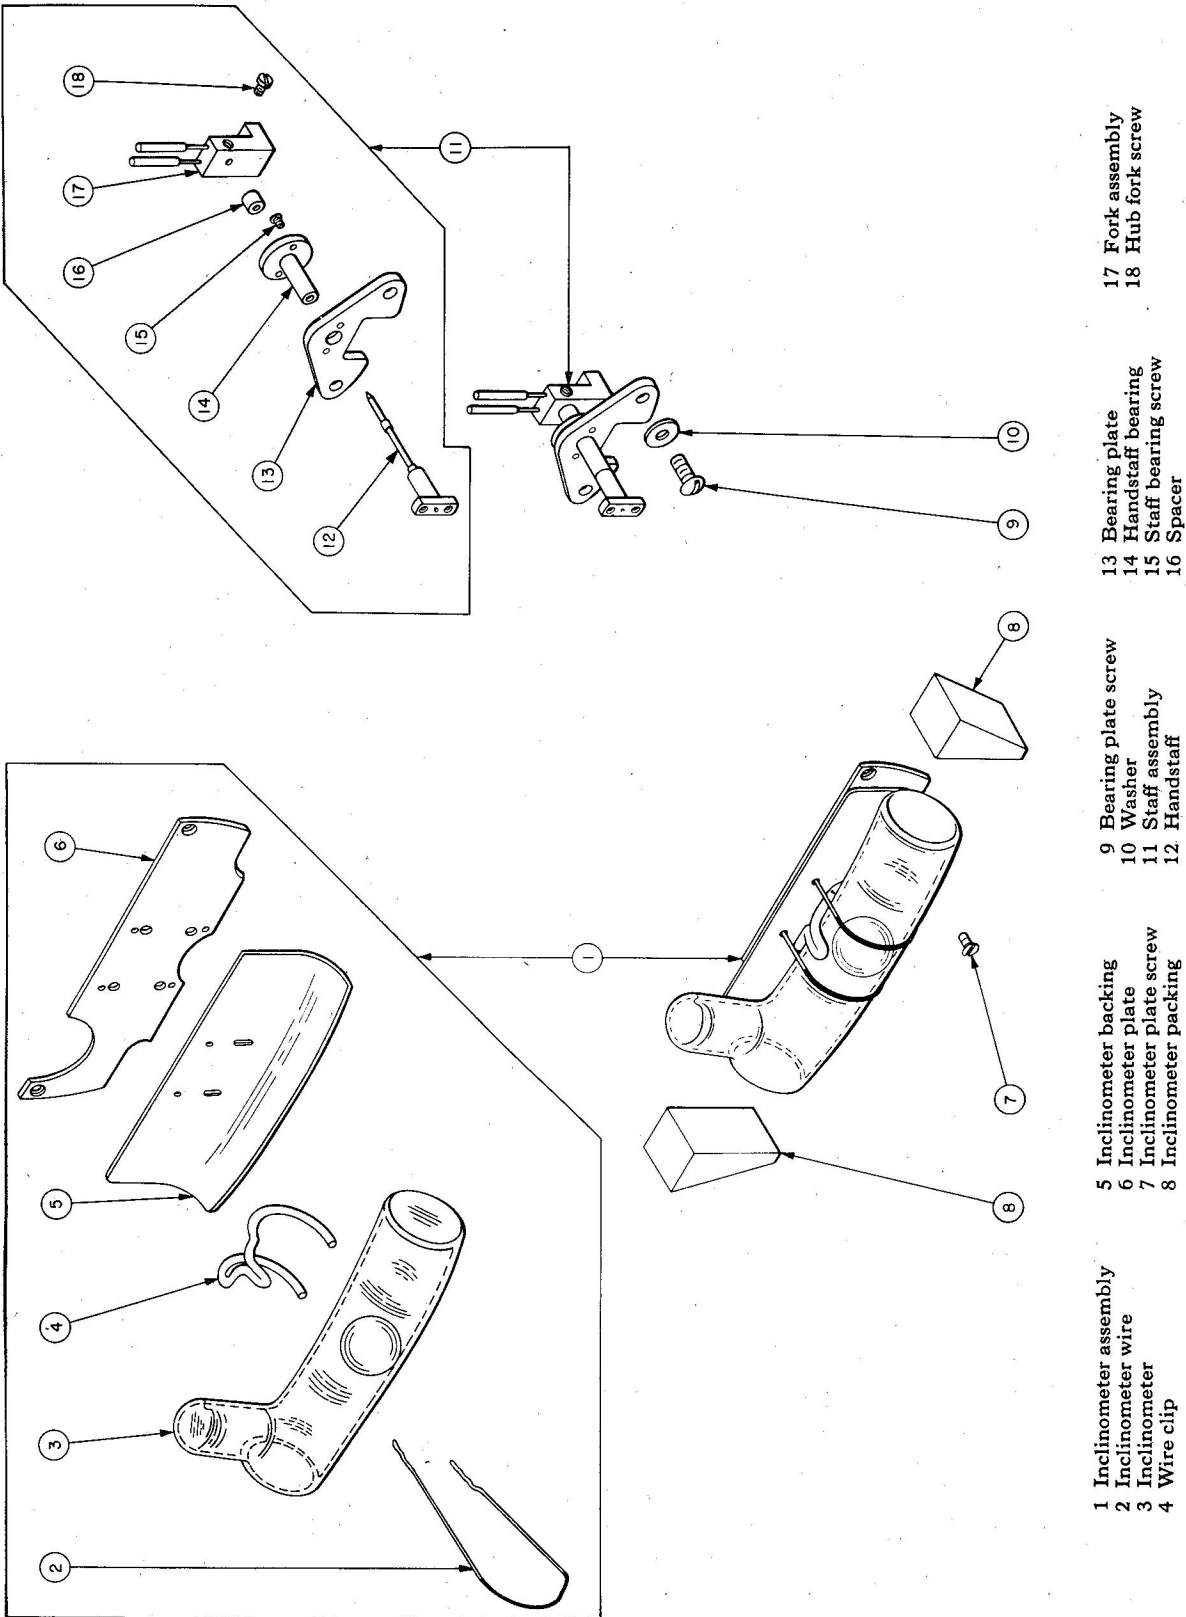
Exploded View Drawing—Inclinometer and Handstaff Assembly—Type A-8 (Pioneer Type 1718-25-A2).
